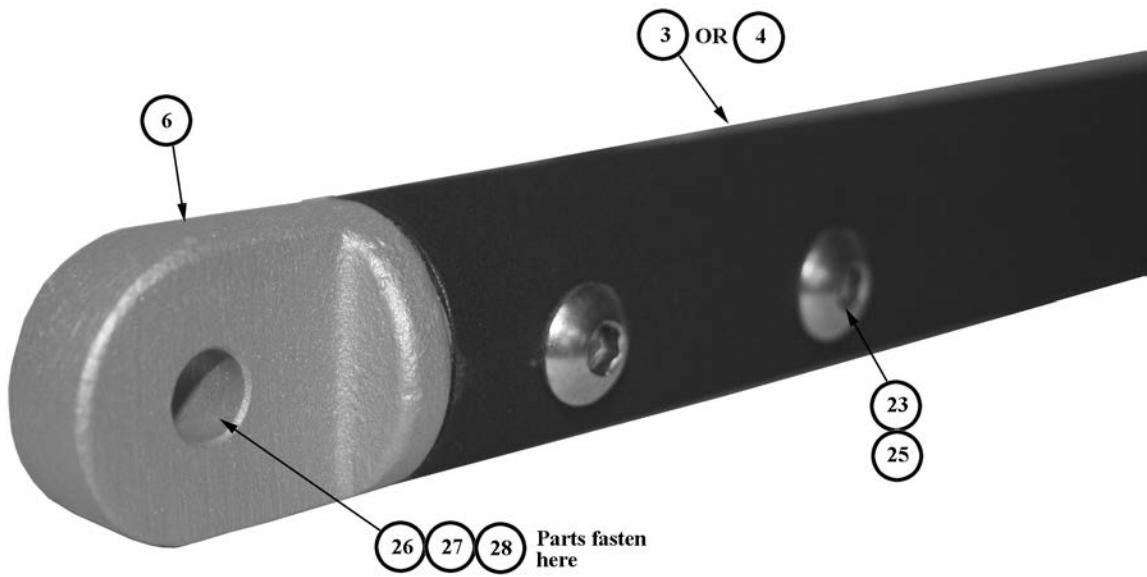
CLEVIS JOINT, MALE IN END OF FOLDING RAIL
